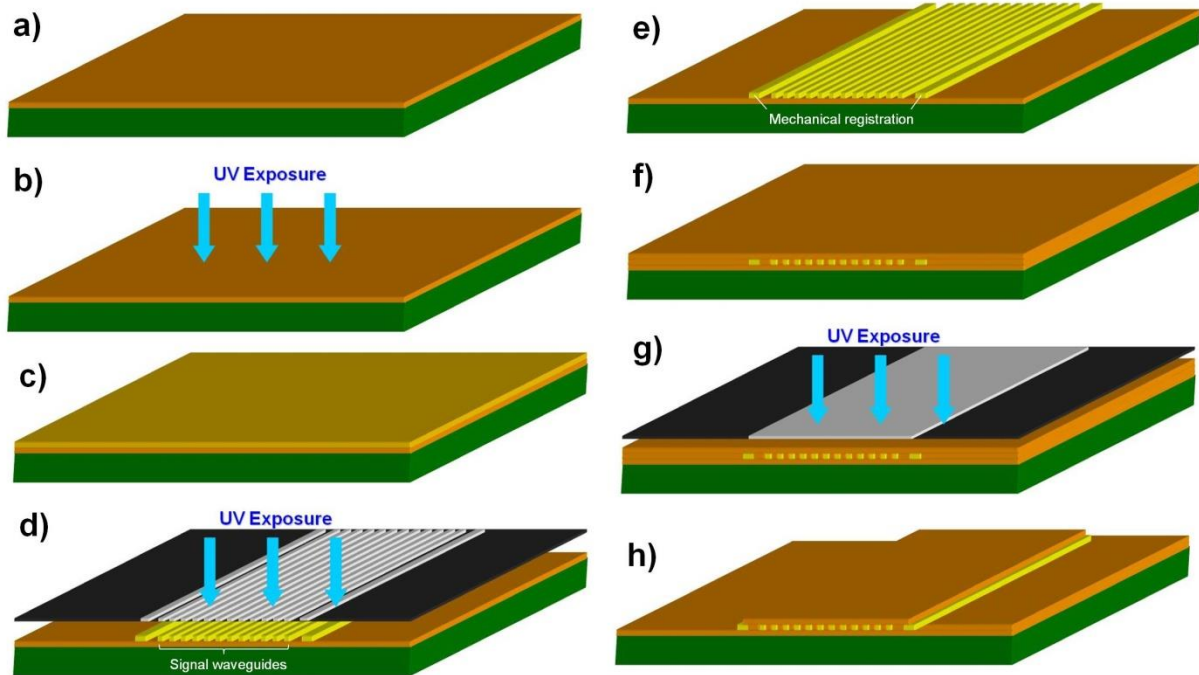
Fabrication process for Storlite optical waveguide PCB
